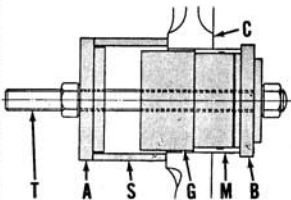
Installation of front or rear main bearing requires use of Yanmar special tool number 124085-92400 for all models except 3HM which requires special tool number 128670-92400. Install special tool as shown and pull new bearing into place being careful not to distort new bearing.
